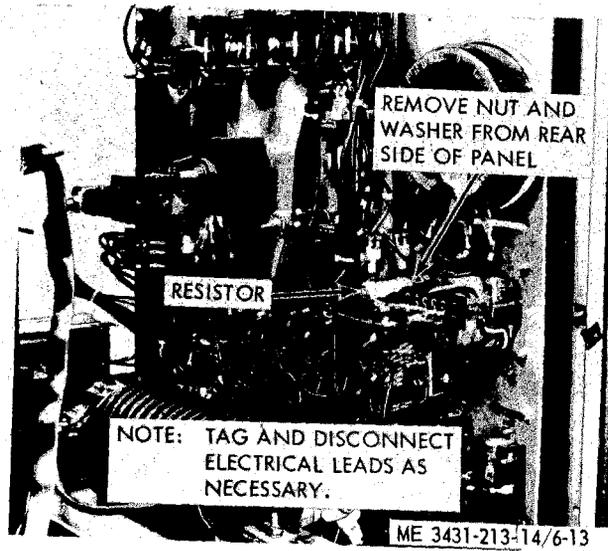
Resistors, removal and installation, Model 2100H2007.
